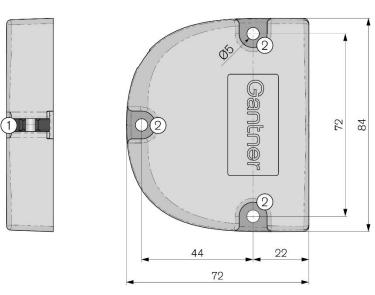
Dimensions of the GAT SMART.Lock 70x1 (measurements in mm)
